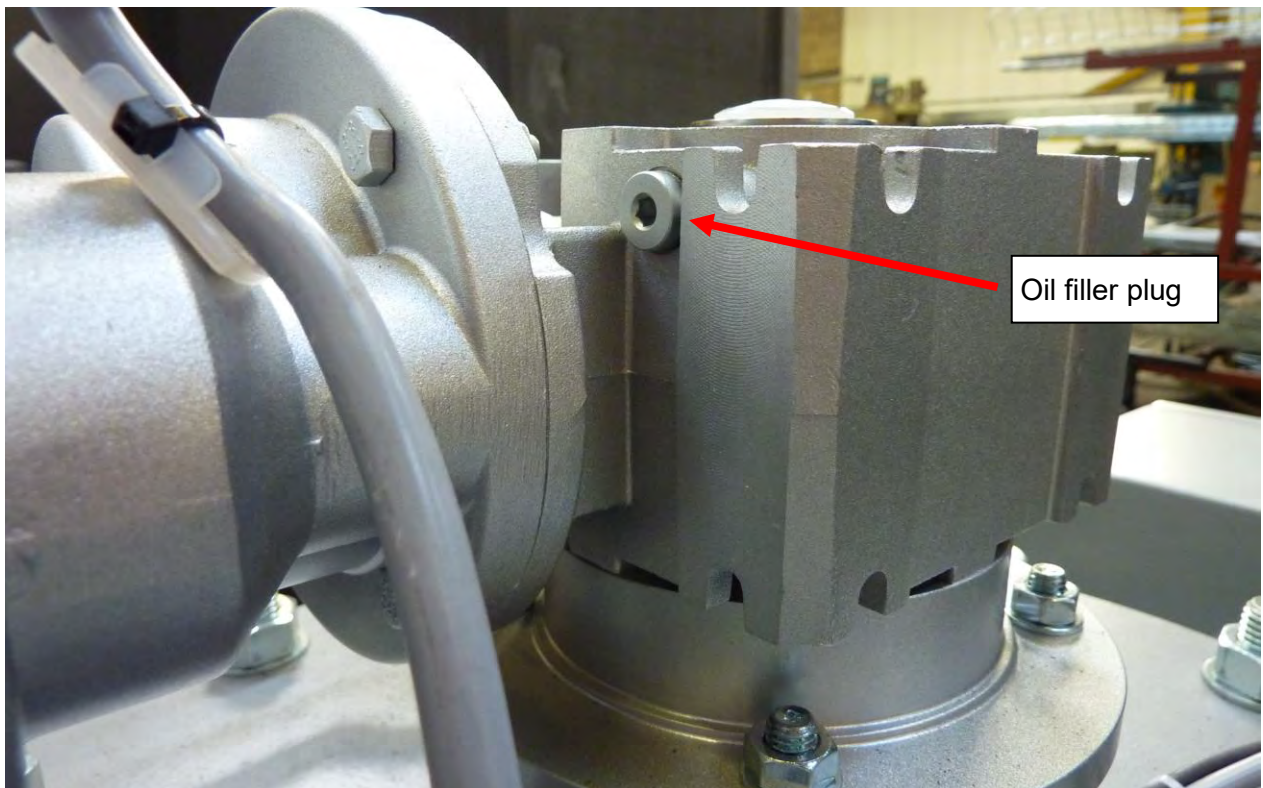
Wash Fine Filter - Oil Filler Plug Location
